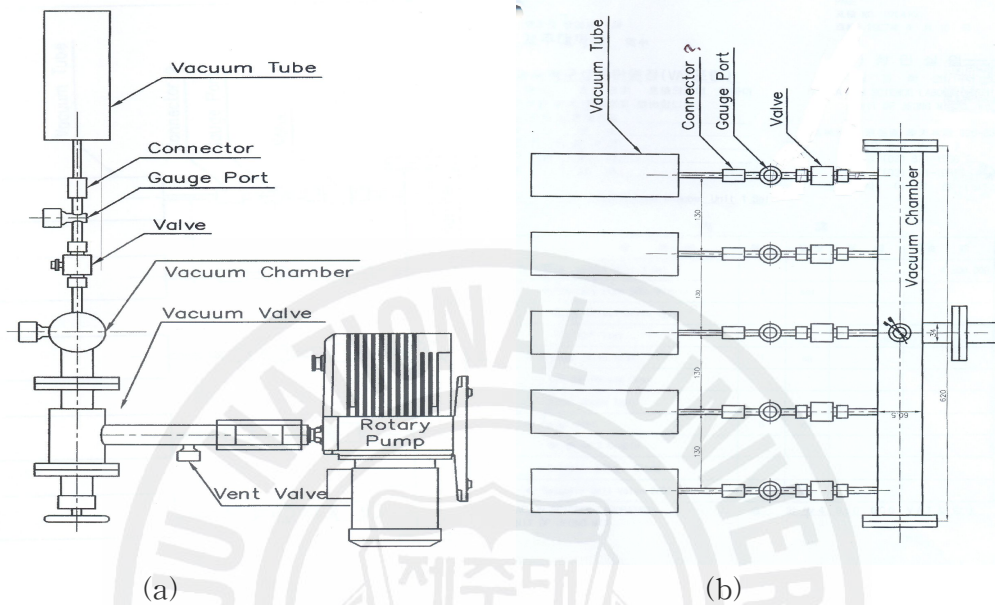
Header-type vacuum chamber ; (a) The general drawing of header-type vacuum chamber , (b) The detail drawing of header-type vacuum chamber connected to nonglass vacuum tube.
